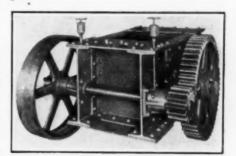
Drive End of Single Roll Crusher Note the cut gears for drive and the heavy riveted structural steel construction
